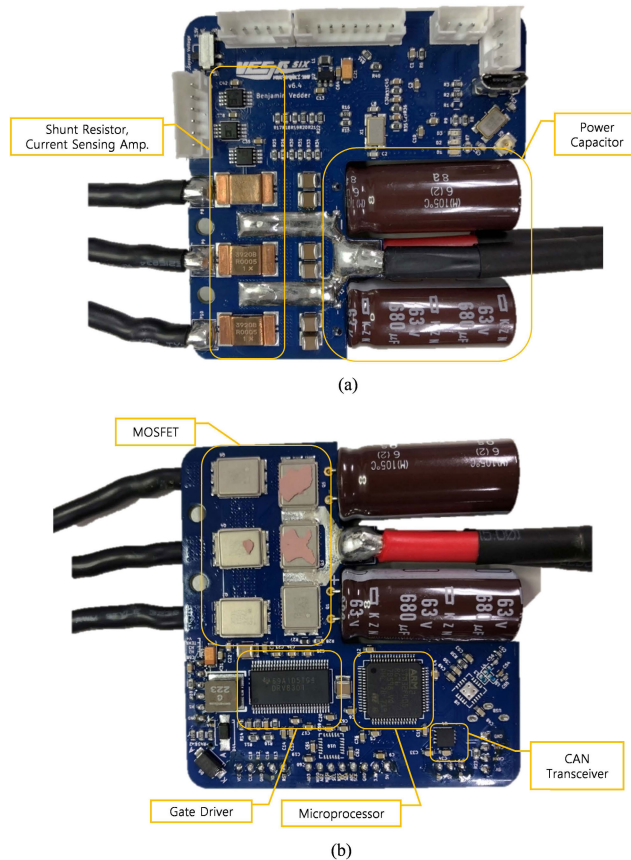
Original VESC PCB Hardware: (a) VESC PCB top side and (b) VESC PCB bottom side.
